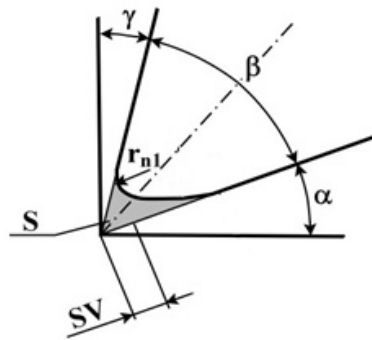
Methods of measurement of the cutting wedge tool-wear.
